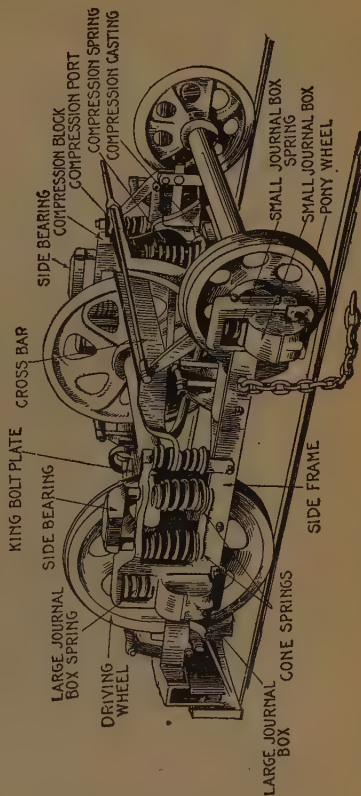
,652.—Brill maximum traction truck. On tangent track 75 per cent. of the weight of this truck comes on the motor axle which has the large wheels. When on a curve, part of this weight is shifted to the trailing wheels. This type is used extensively in city street car service and is not adapted to high speed. One motor is used on each truck.
